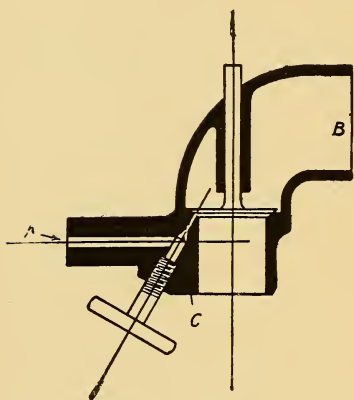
A. Petrol inlet to Controller. B. Inlet pipe to Engine. C. Needle valve to regular flow of petrol.
